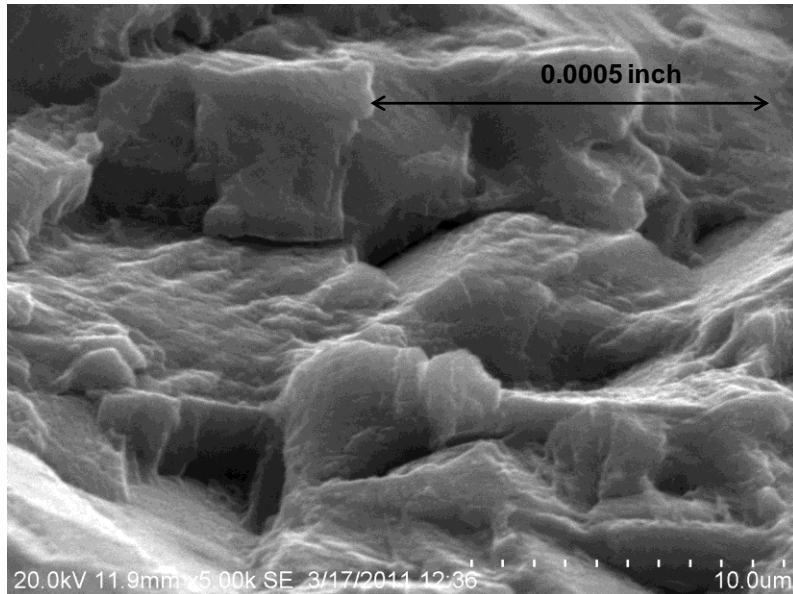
Fracture Surface from Specimen S7-07 (lot 620853) from as-received Stringer-7 Sister
